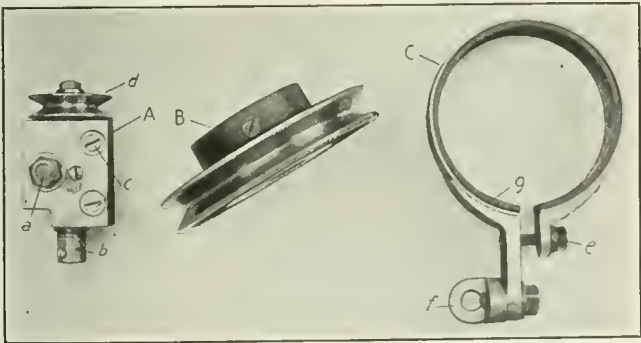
Brown & Sharpe Cross-slide Drilling Attachment
